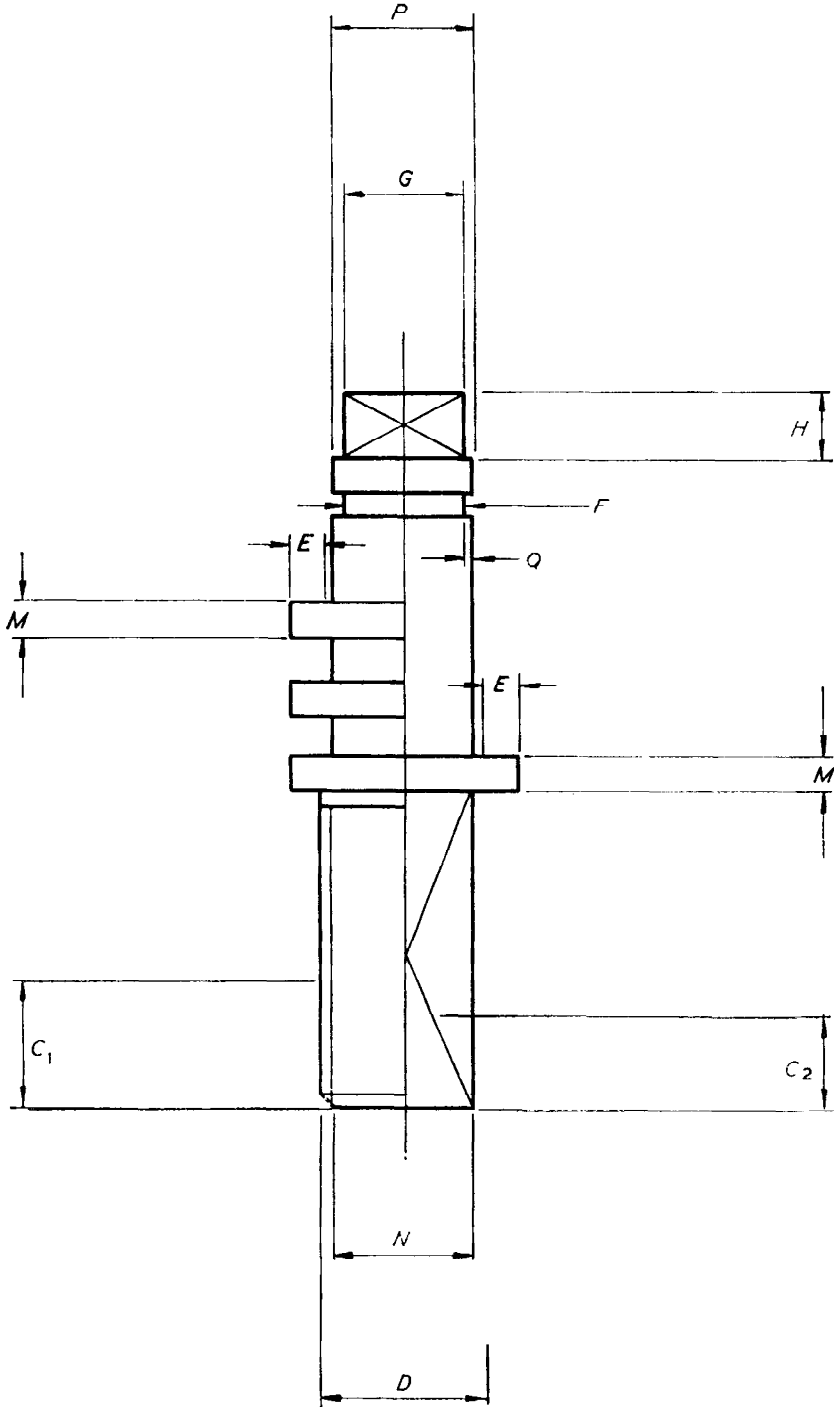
Spindle of non-rising spindle type taps and valves (see Tables 8 and 21)
